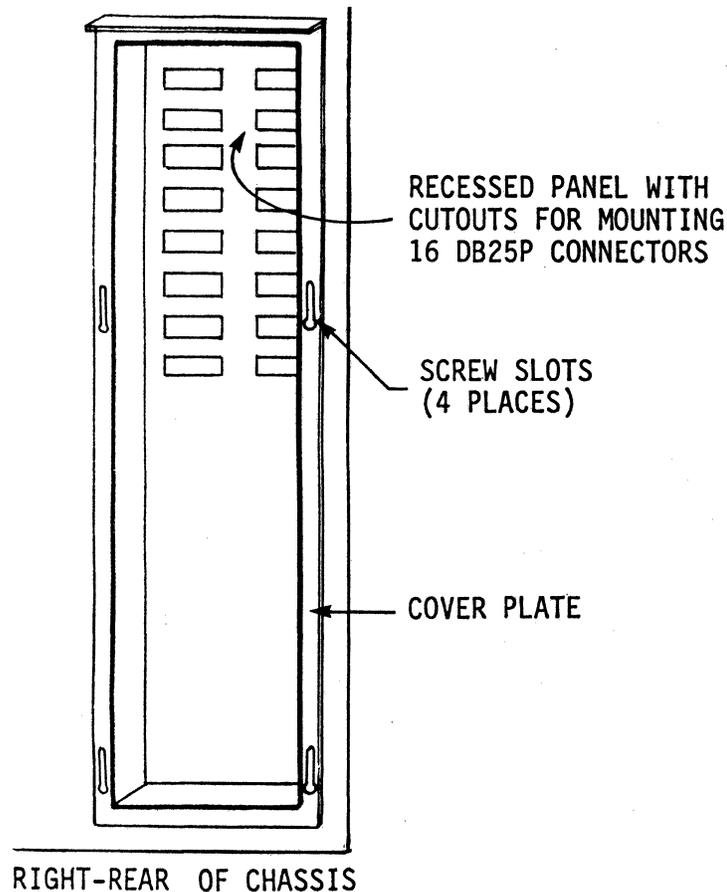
REAR PANEL CONNECTOR MOUNTING
